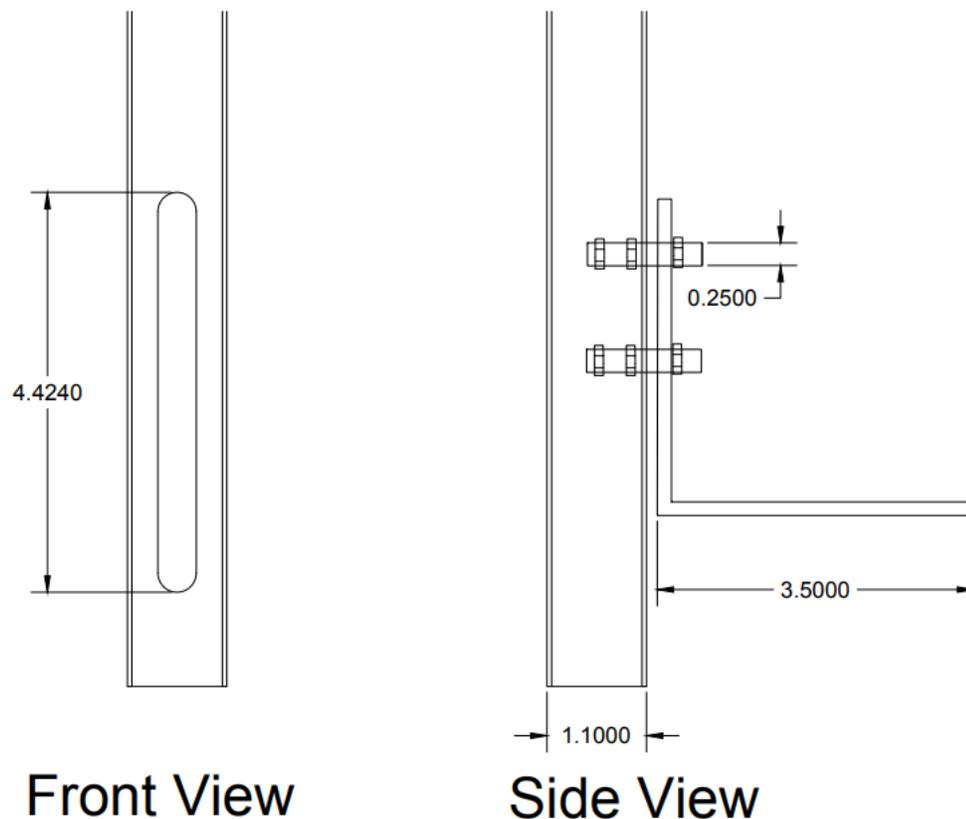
AutoCAD drawing of foot pedal by Joseph Hollingsworth.
